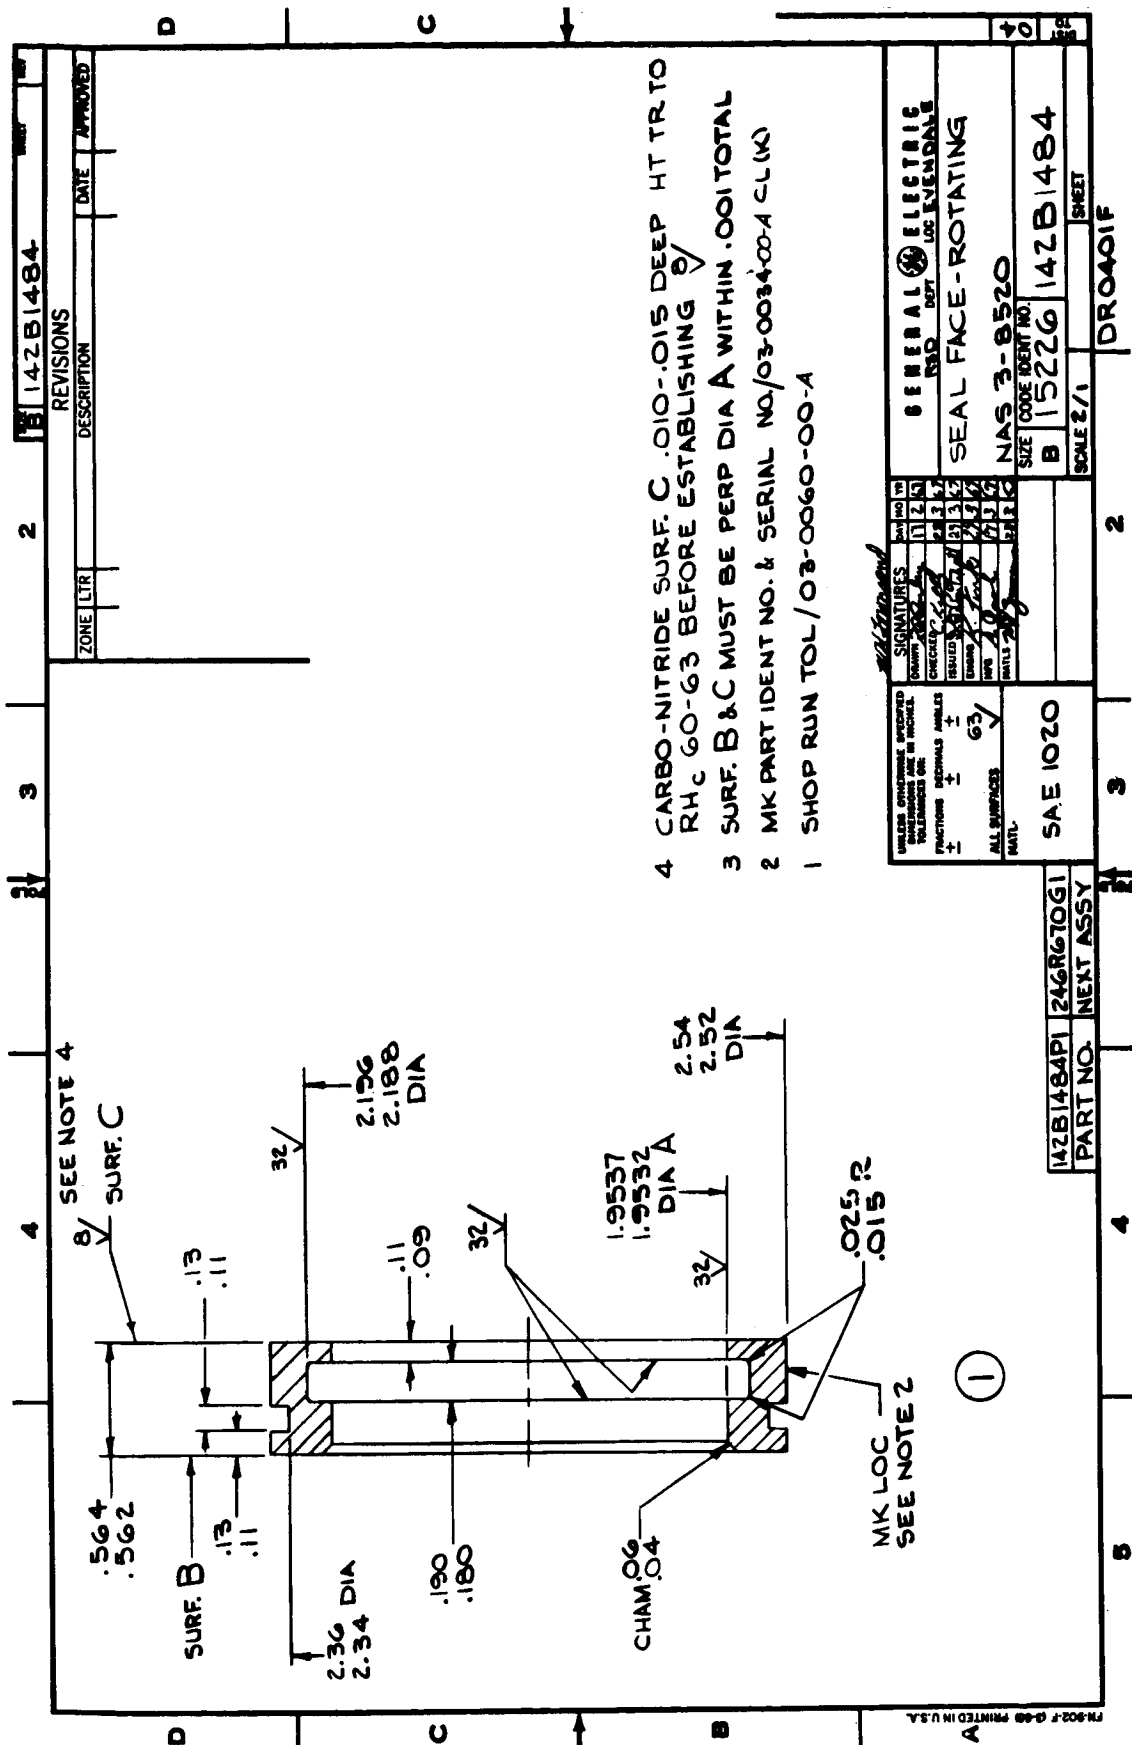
Rubbing Face for Carbon Seal. (142B1484)
